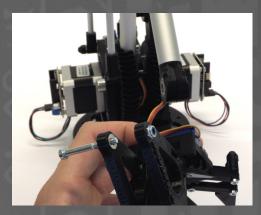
Press the gripper assembly and the end triangles 16 and 17 together. Insert the M4x35 mm bolt and add a M4 washer as shown.
